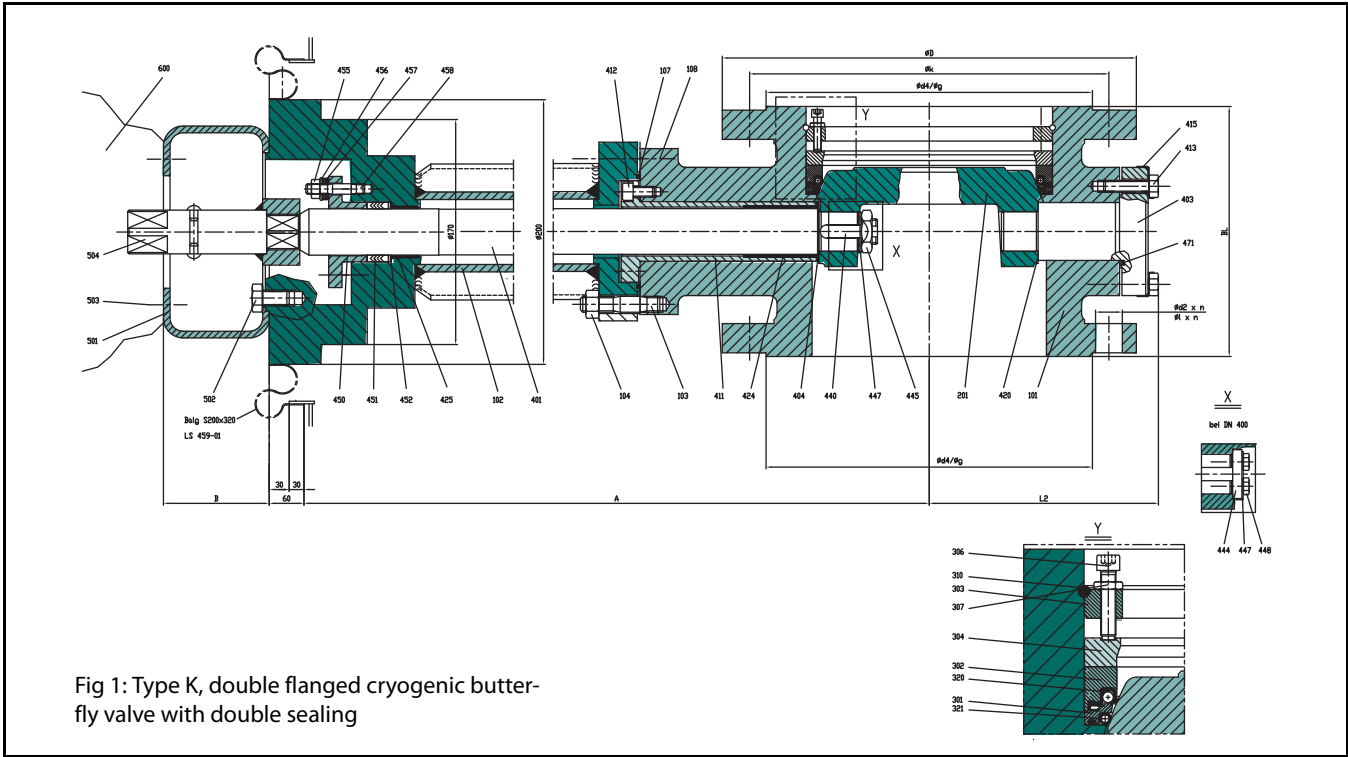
Type K, double flanged cryogenic butterfly valve with double sealing
